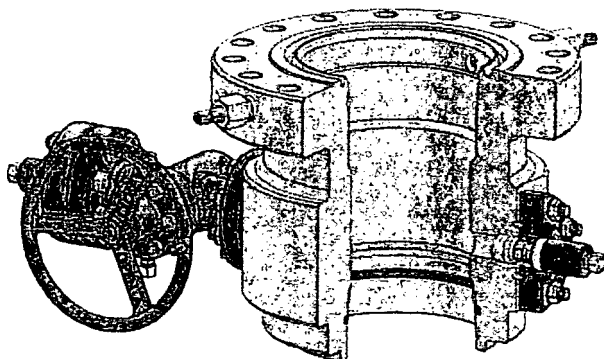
Slip-On Weld (SOW) Casing Head
